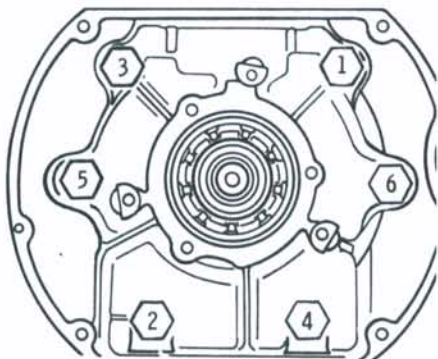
View of tightening sequence for crankcase screws. Tighten to 16 ft.-lbs.
